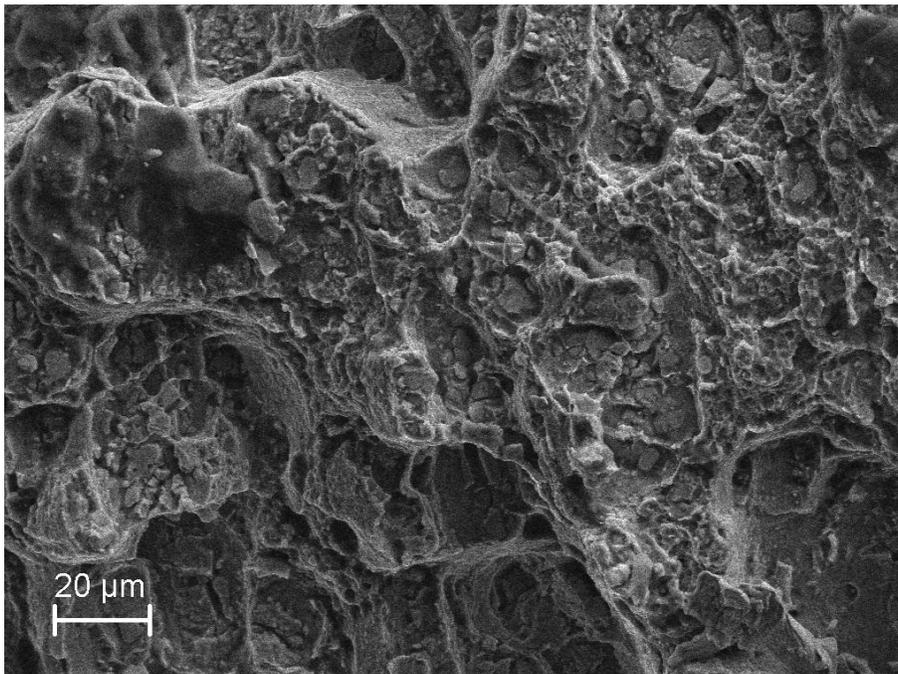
SEM image of SRT-4 fracture surface through weld nugget.
